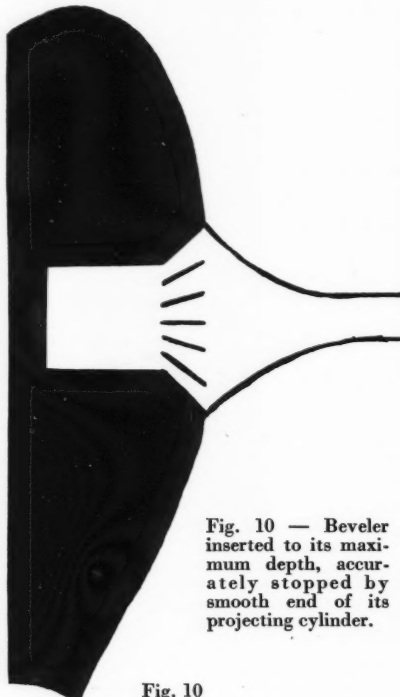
Beveler inserted to its maximum depth, accurately stopped by smooth end of its projecting cylinder.
